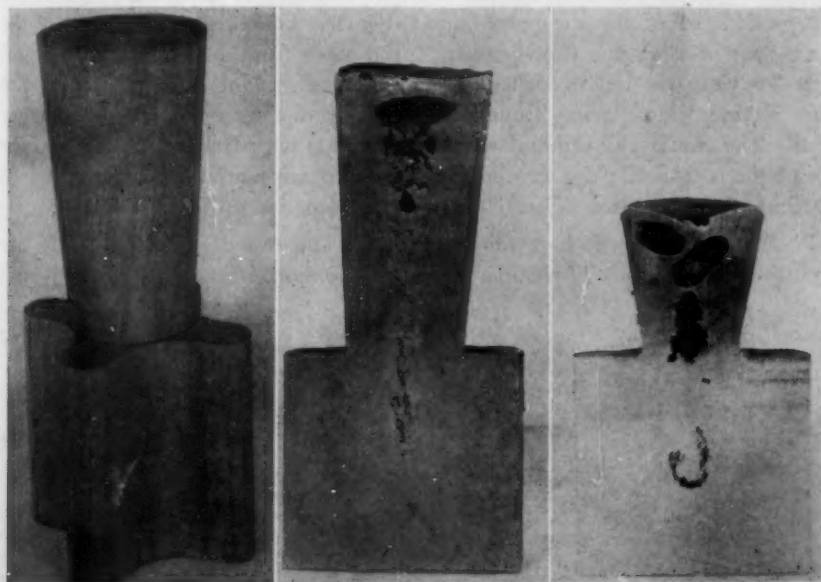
LEFT—PATTERN NO. 7—USED IN TESTS TO DETERMINE HEIGHT OF RISERS NECESSARY TO PRODUCE SOUND SPECIMENS. FIG. 13—RIGHT—VIEWS OF SECTIONED CASTINGS FROM PATTERN NO. 7 (FIG. 12) SHOWING SHRINKAGE WHEN USING 3-IN. AND 6-IN. RISERS.
